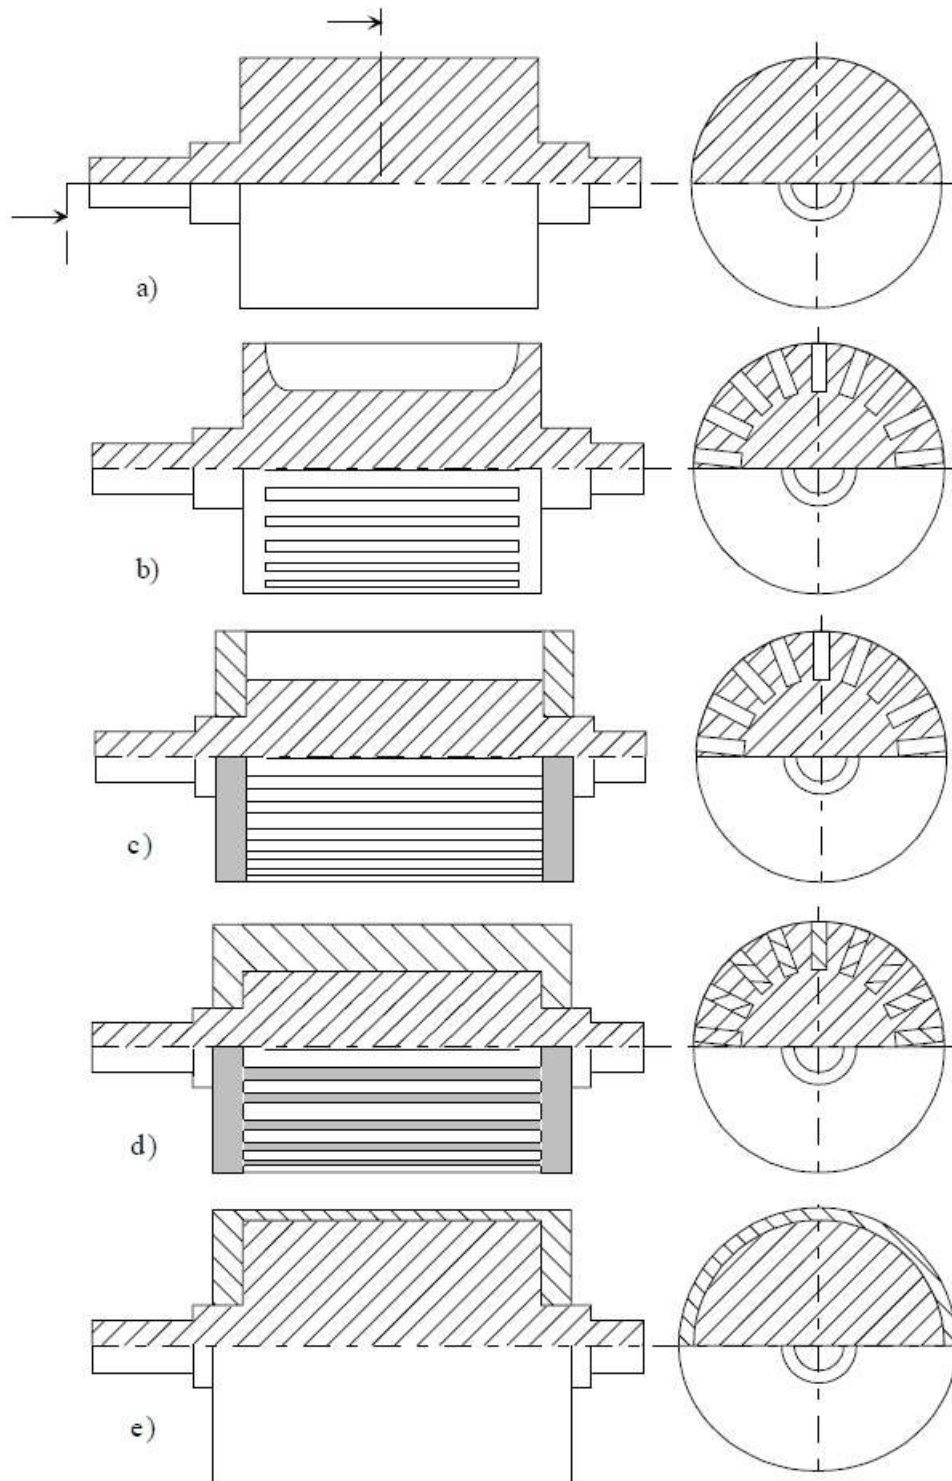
Solid-rotor designs: a) smooth solid rotor, b) axially slitted solid rotor, c) axially slitted solid rotor with end-ring structure, d) solid rotor with deep copper bars and end rings (squirrel cage), e) smooth solid rotor with coating. (Huppunen, 2004)
